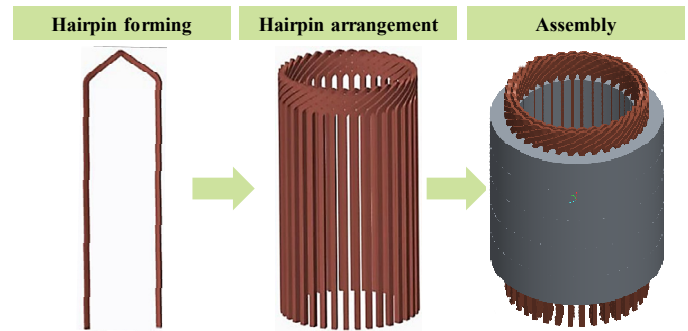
Hairpin arrangement and assembly (comp: [6])
